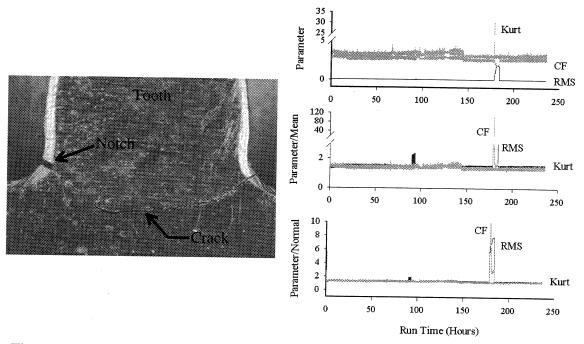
Gear tooth fracture after test 1 Figure 5. Test 1, case accelerometer analysis
